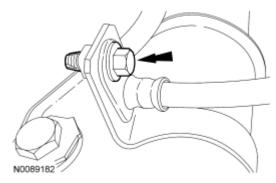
Identifying Fuel Supply Tube Courtesy of FORD MOTOR CO.
